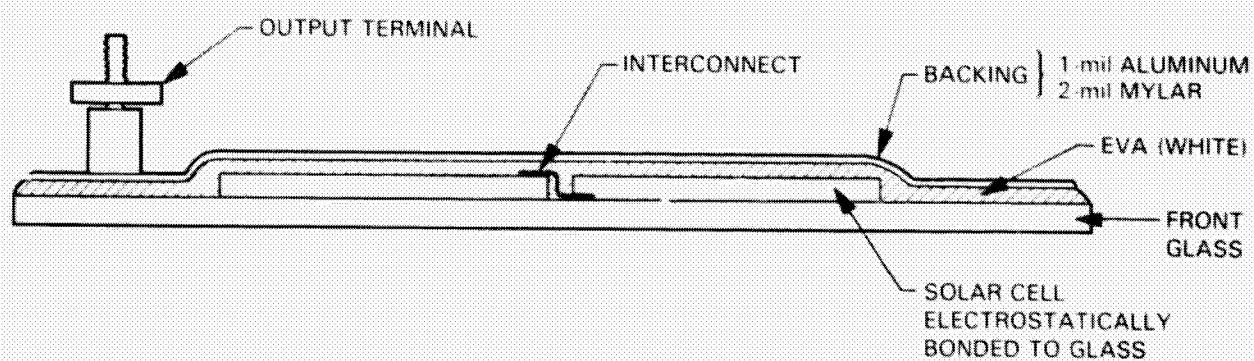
Cross-Sectional View of Integral Front-Conventional Back Module Assembly
